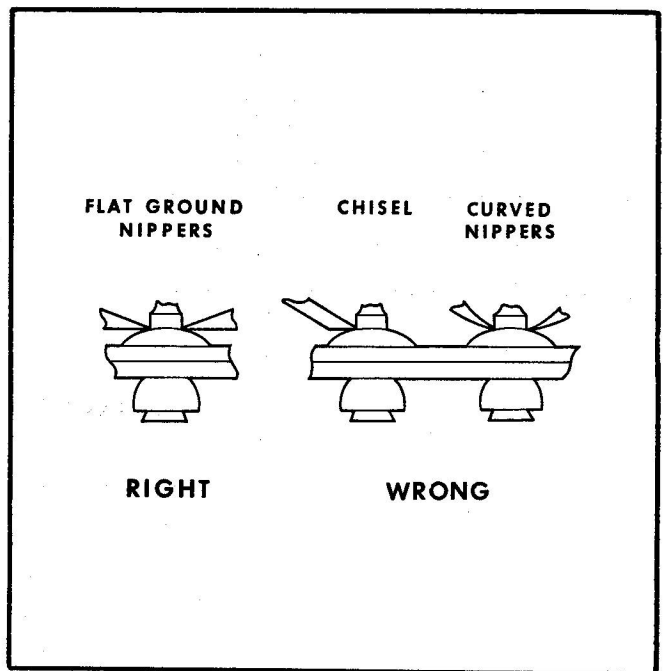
Trimming Stems of Standard Self-Plugging Rivets
